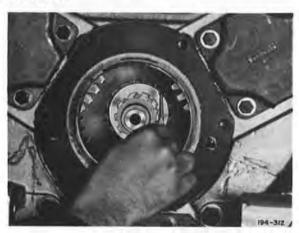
Disengaging Fourth Speed Gear Thrust Washer for Removal
